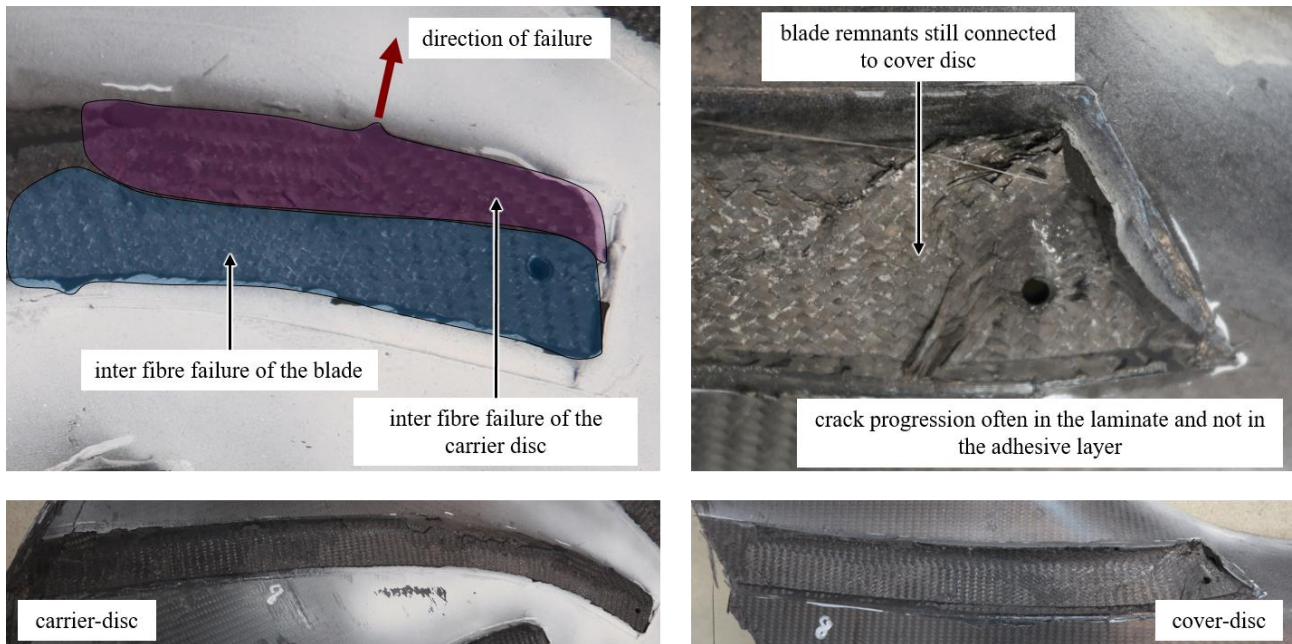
fracture surfaces of the fragments with interlaminar failure in the components of the blade, the disks and the adhesive
